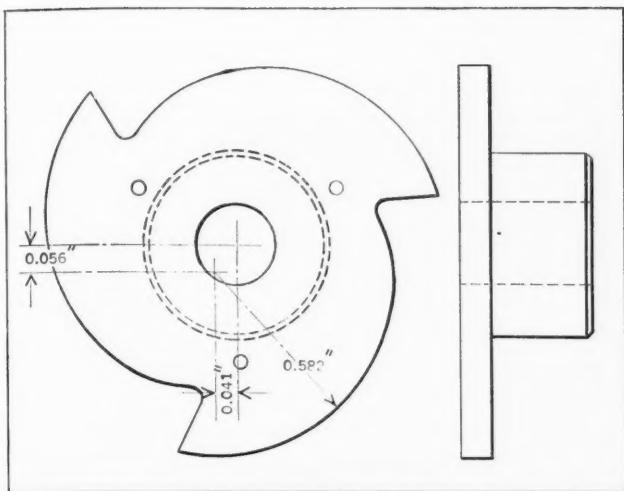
Taximeter Cam which is Burnished in the Machine Shown in Fig. 1
